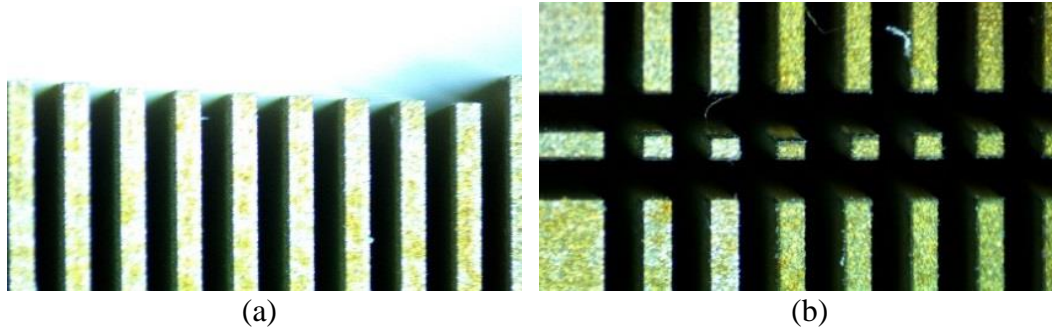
Images of the 9 test beams manufactured by wire EDM. (a) Manufactured beam from the side view. (b) Manufactured beam from the top view.
